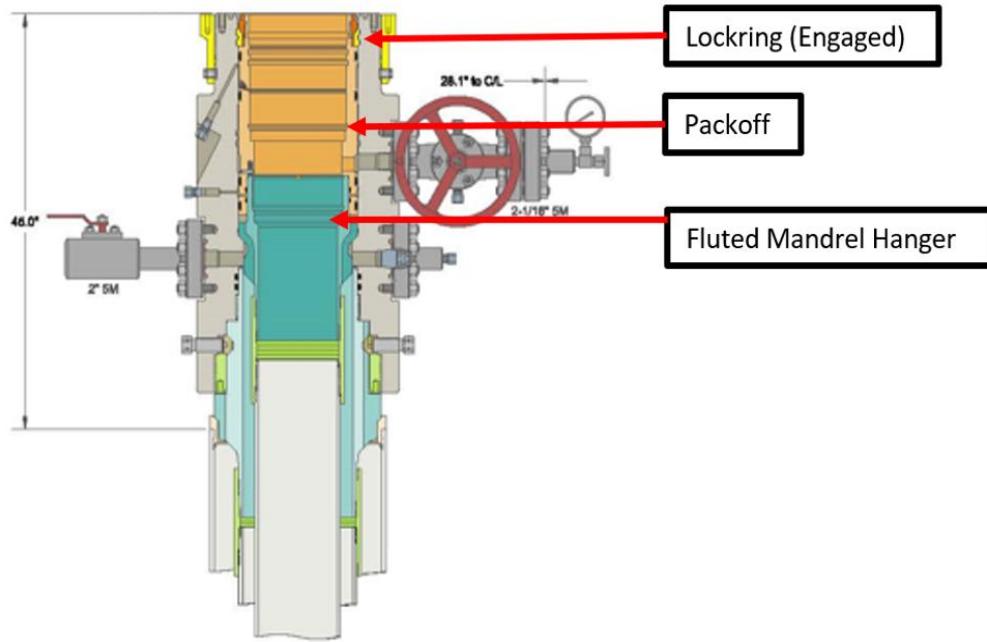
Cactus Offline Cementing Tool Schematic (5M tool)
